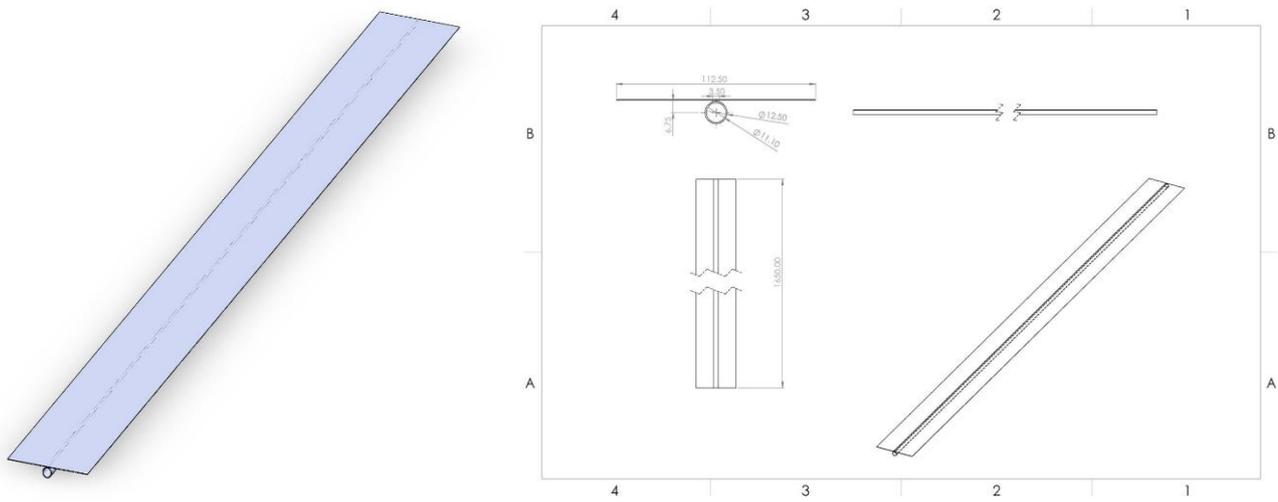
Flat Plate Collector Single Tube Riser 3D & 2D Dimension
